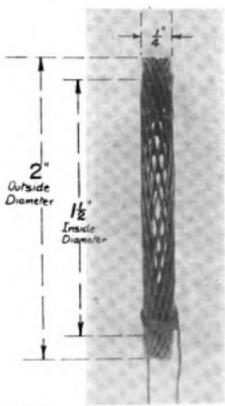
Machine Wound Honeycomb Coils showing the formation of the wire.
